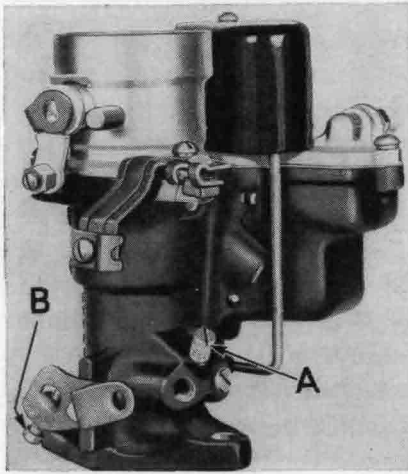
Idle-mixture screw (A) and idle-speed adjusting screw (B) on one type of carburetor. (*Chevrolet Motor Division of General Motors Corporation*)
